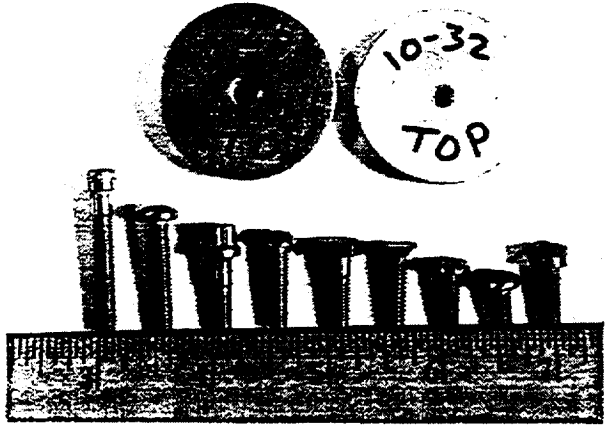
Aluminum Masks and an Assortment of Threaded Fasteners.
